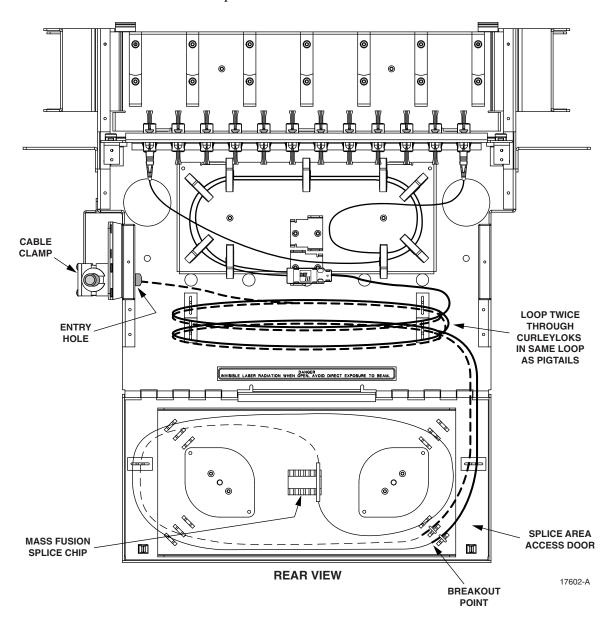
Cable Routing (7- and 9-Inch High Panel)
